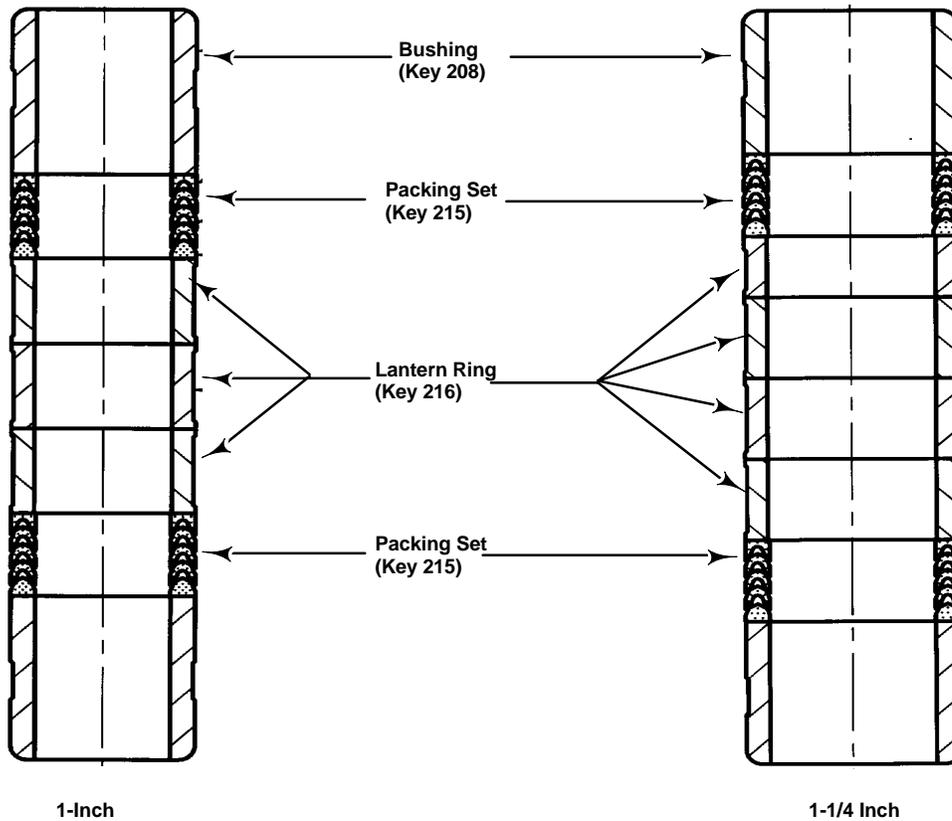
PTFE V-RING WITH ONE-PIECE BUSHING
